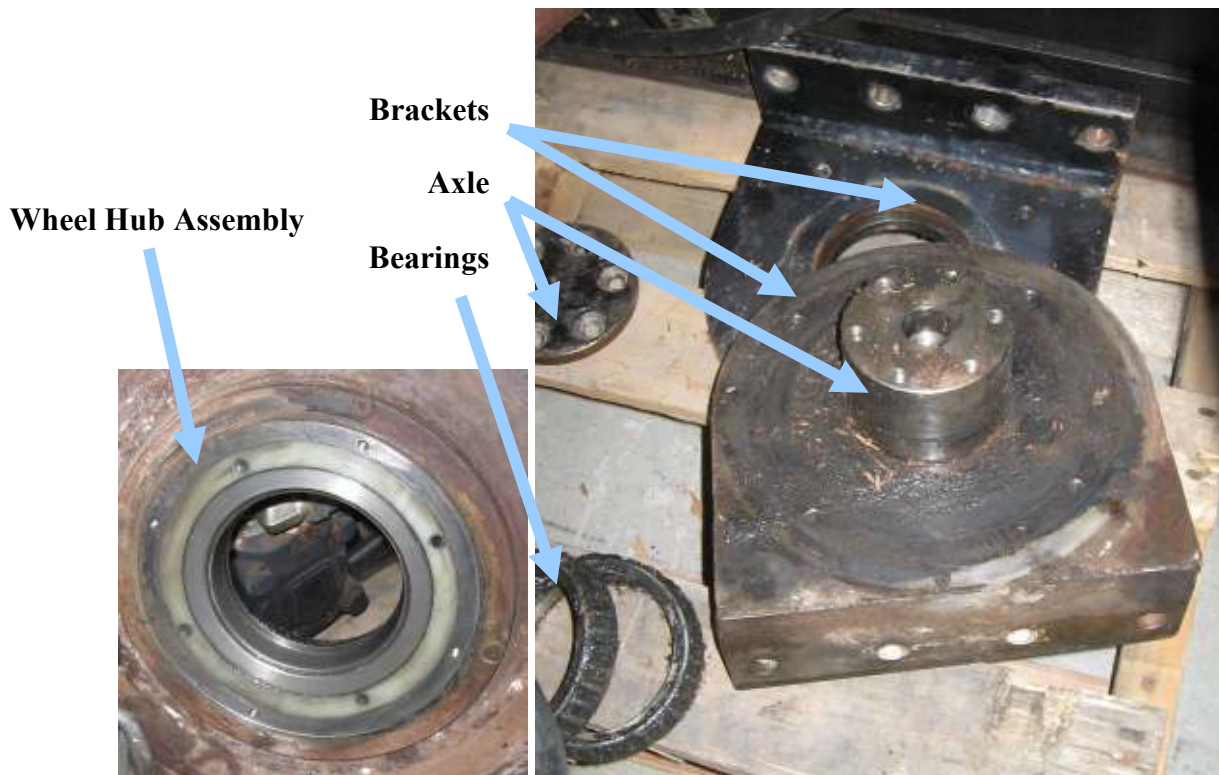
Hub Assembly and Axle of CONEQTEC Rock Saw.
